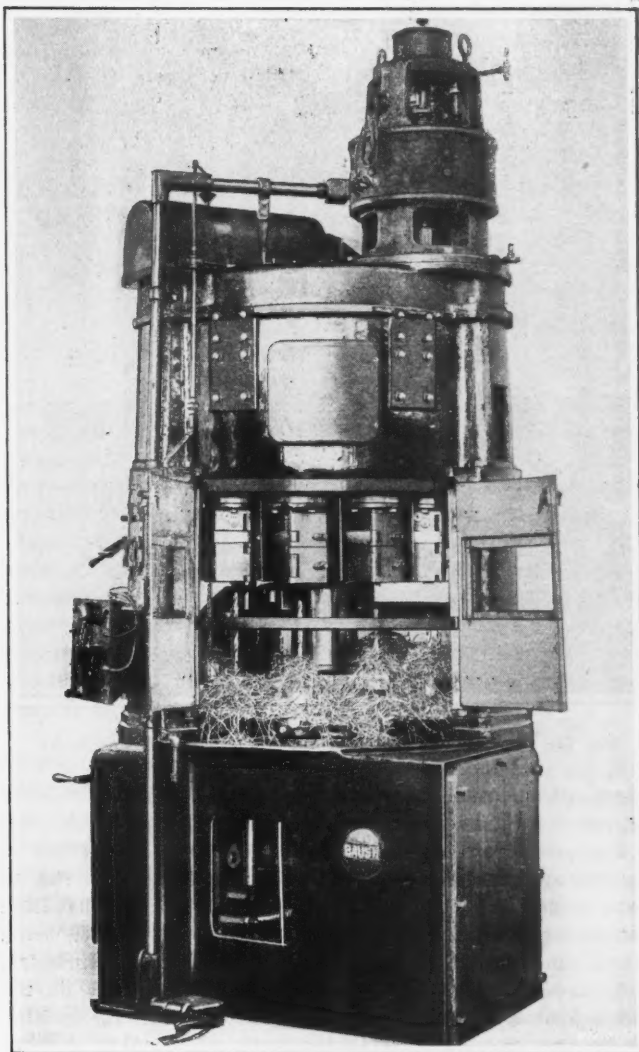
Baush Station Type Drilling Machine for drilling Rifle Bolts and Receivers
